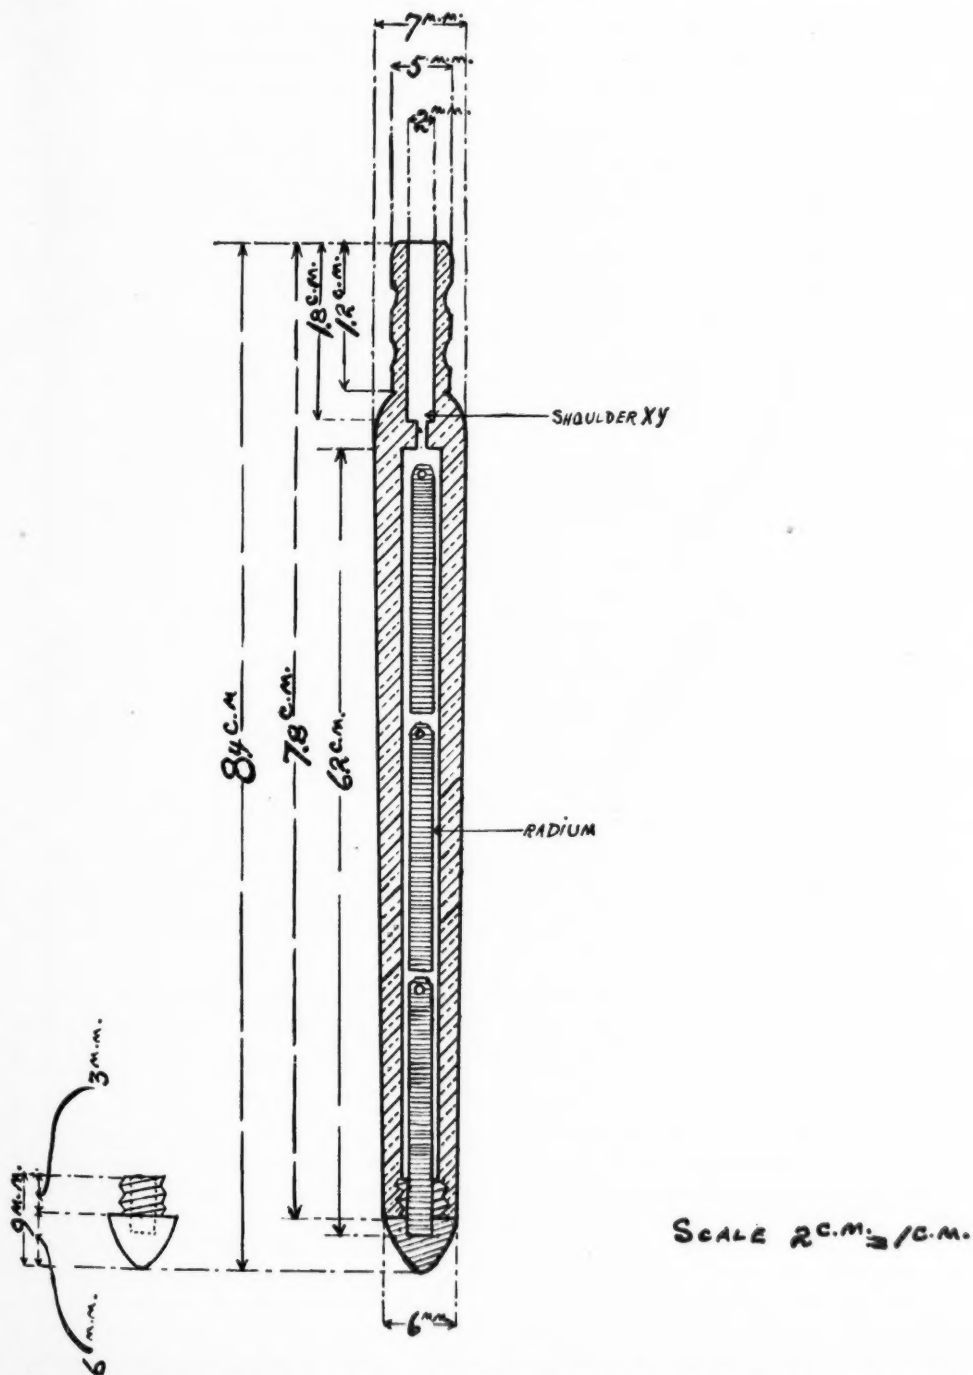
Mechanical drawing of the three-tube radium capsule. XY is the shoulder through which the fishing cord passes and is held intact by means of a knot tied on the inner end.
